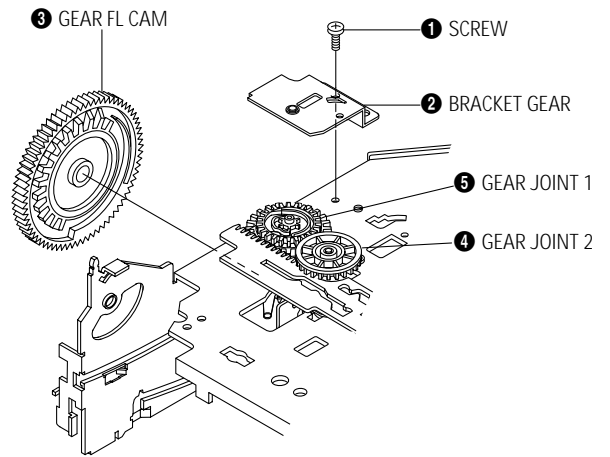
Bracket Gear, Gear FL Cam, Gear Joint 1, 2 Removal
